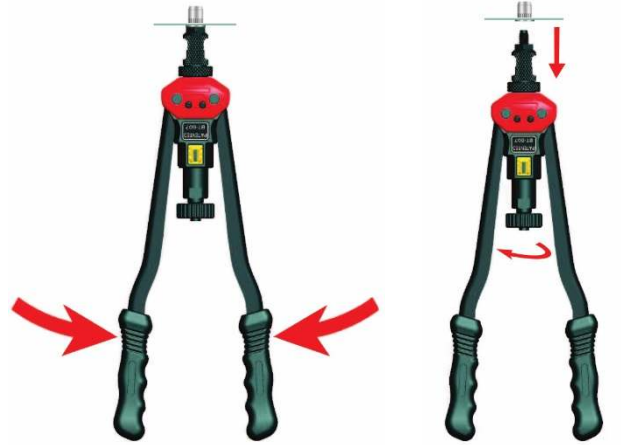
Figure D. (Left) Put the rivet nut into the hole and close the handles to rivet.
